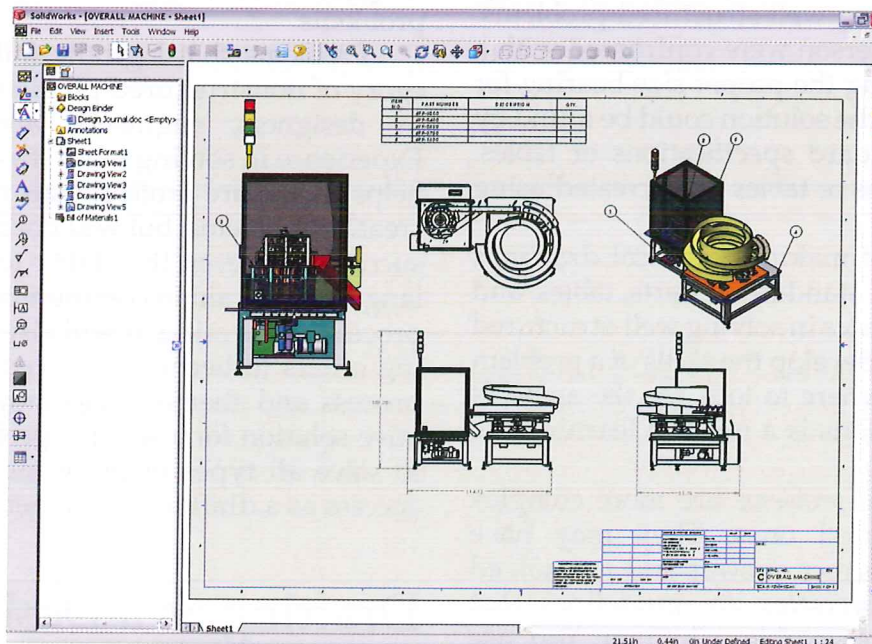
Several types of presentation drawings are sometimes combined to describe the various components of a product. Shown are CAD-generated views of a machine assembly. (Image courtesy of SolidWorks Corporation)
